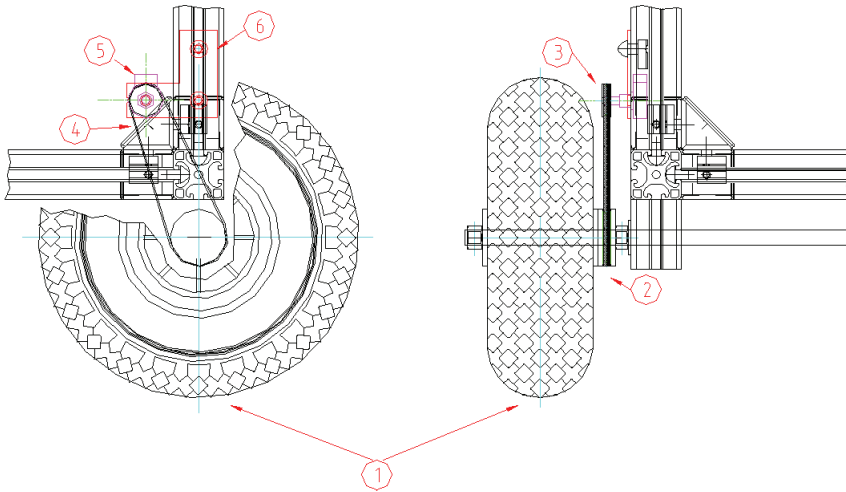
Technical draw to show the assembly between the wheel and the encoder. 1 – wheel, 2 – gear wheel, 3 – gear encoder, 4 – pulley, 5 – encoder, 6 – encoder support.
